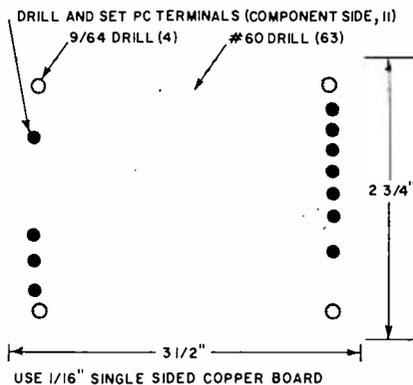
(above). Drilling details for the printed board. Actual-size board is shown on page 98.
